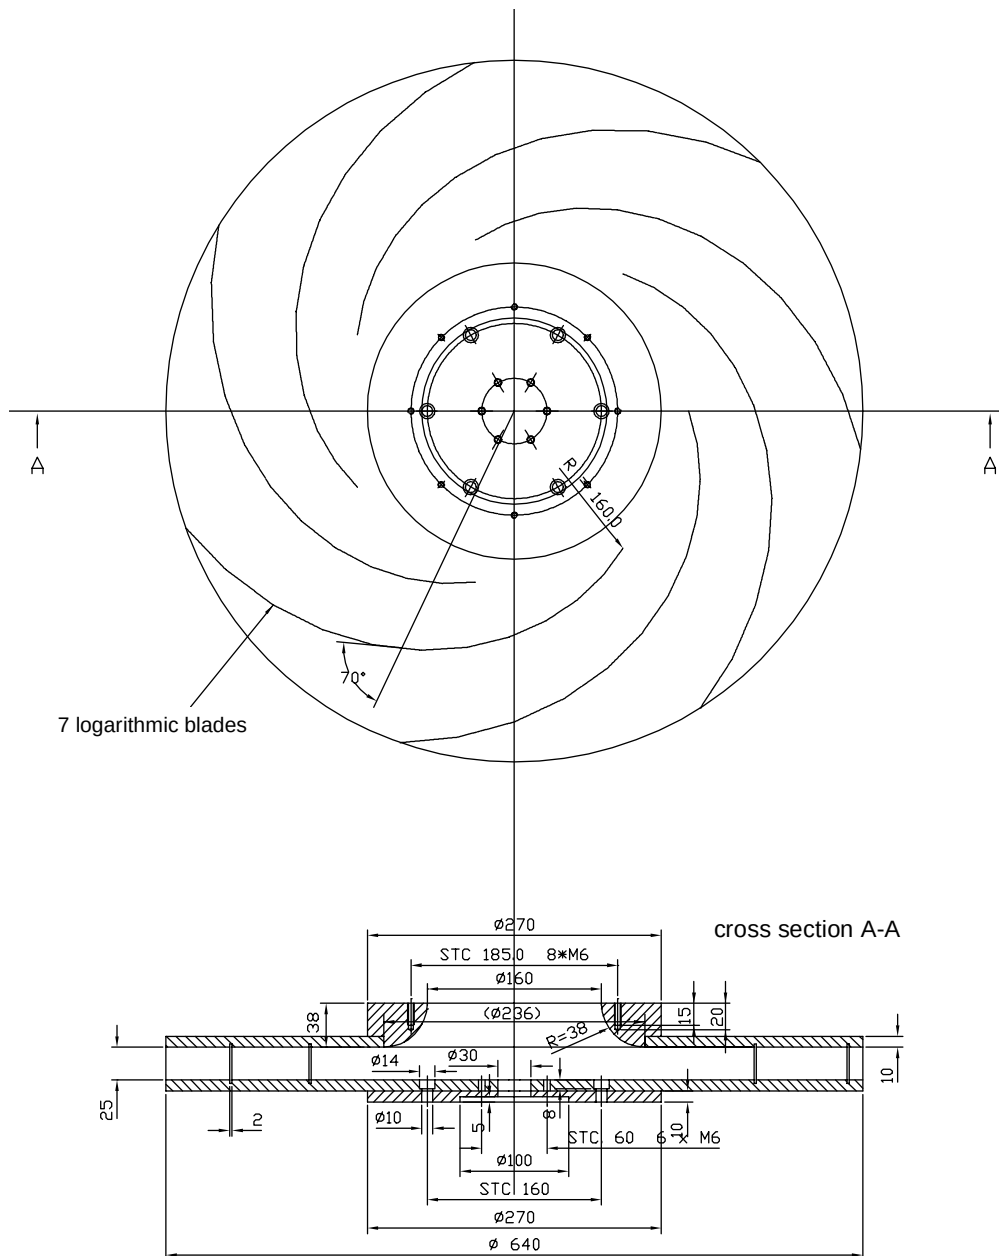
Two-dimensional test impeller at laboratory test rig (length in mm).
